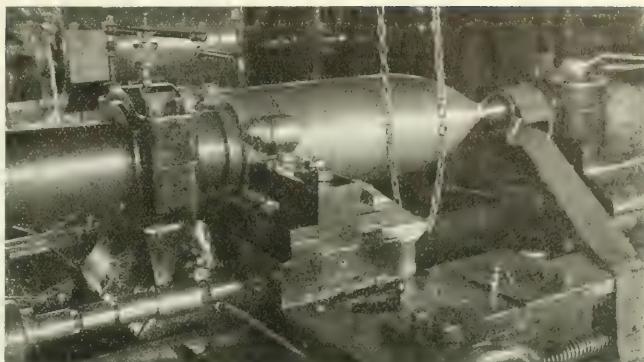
STANDARD ENGINE LATHE WITH ECCENTRIC DRIVEN WAVING TOOL OPERATED THROUGH GEAR DRIVEN BY SHAFT FROM FACE PLATE.
